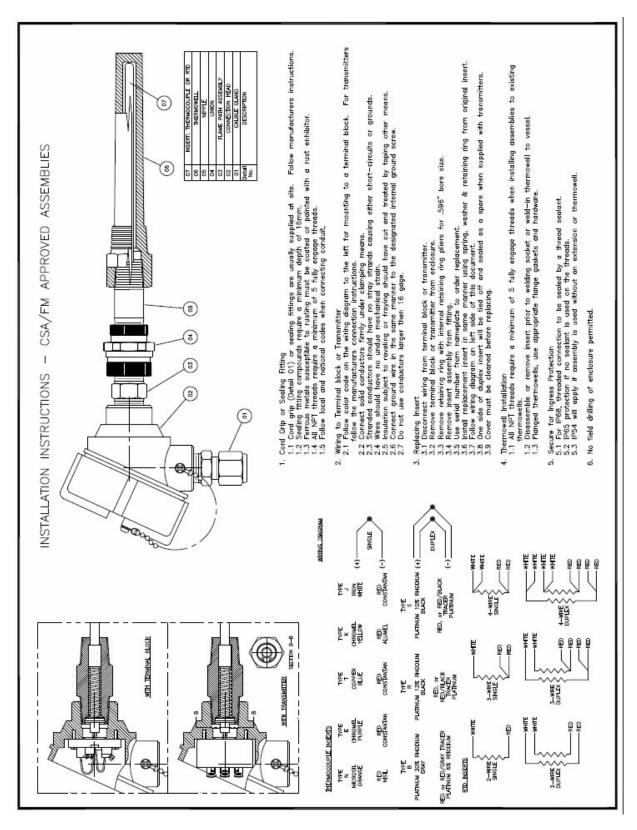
CSA/FM Installation Instructions Series STT830/840 Connection Head
